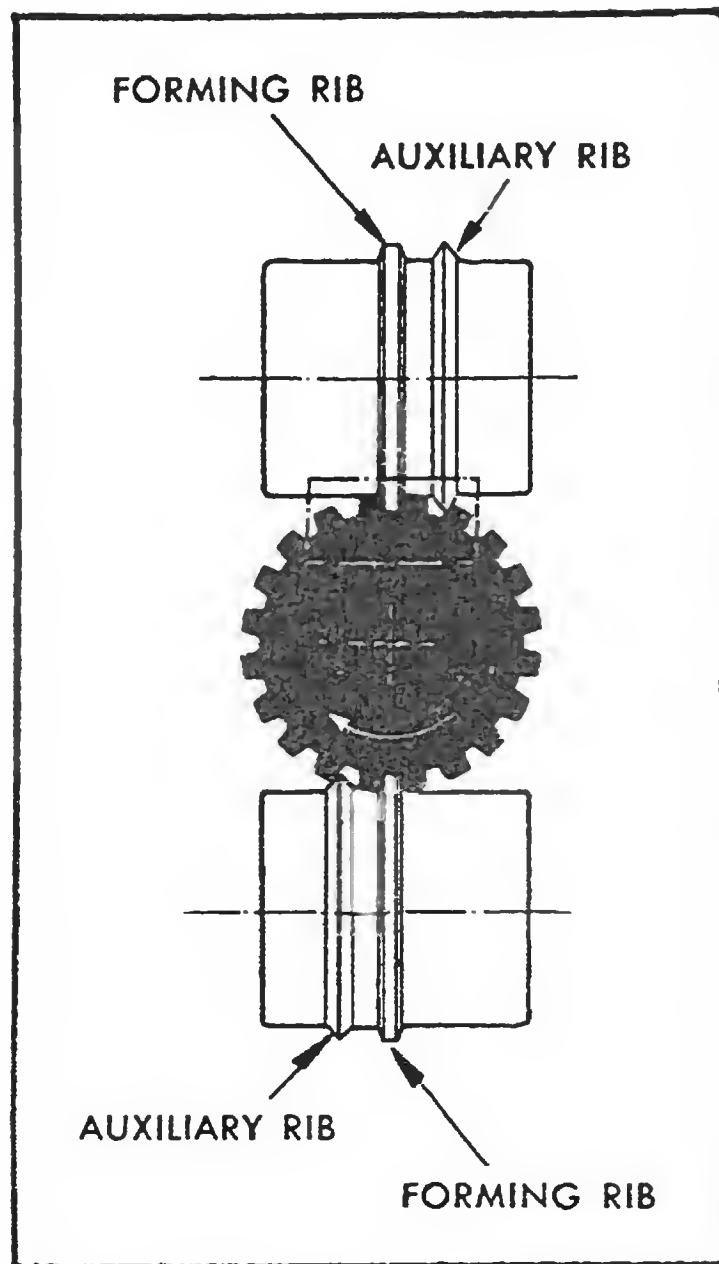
The Pair of Identical Rollers used in Cold Forming Splines or Gears each have One Forming Rib and an Auxiliary Rib
